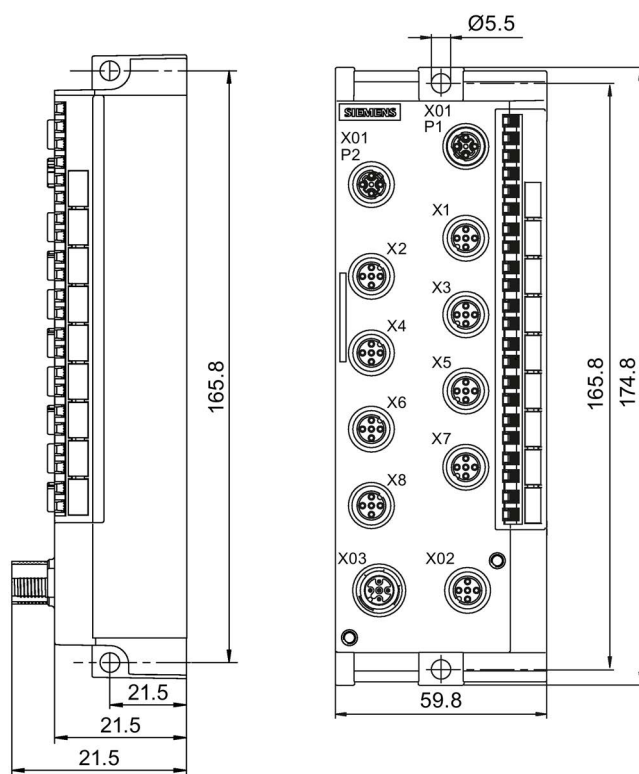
Mounting the I/O device on a panel (60 mm), for example 16 DO DC 24V/1,3A 8×M12
